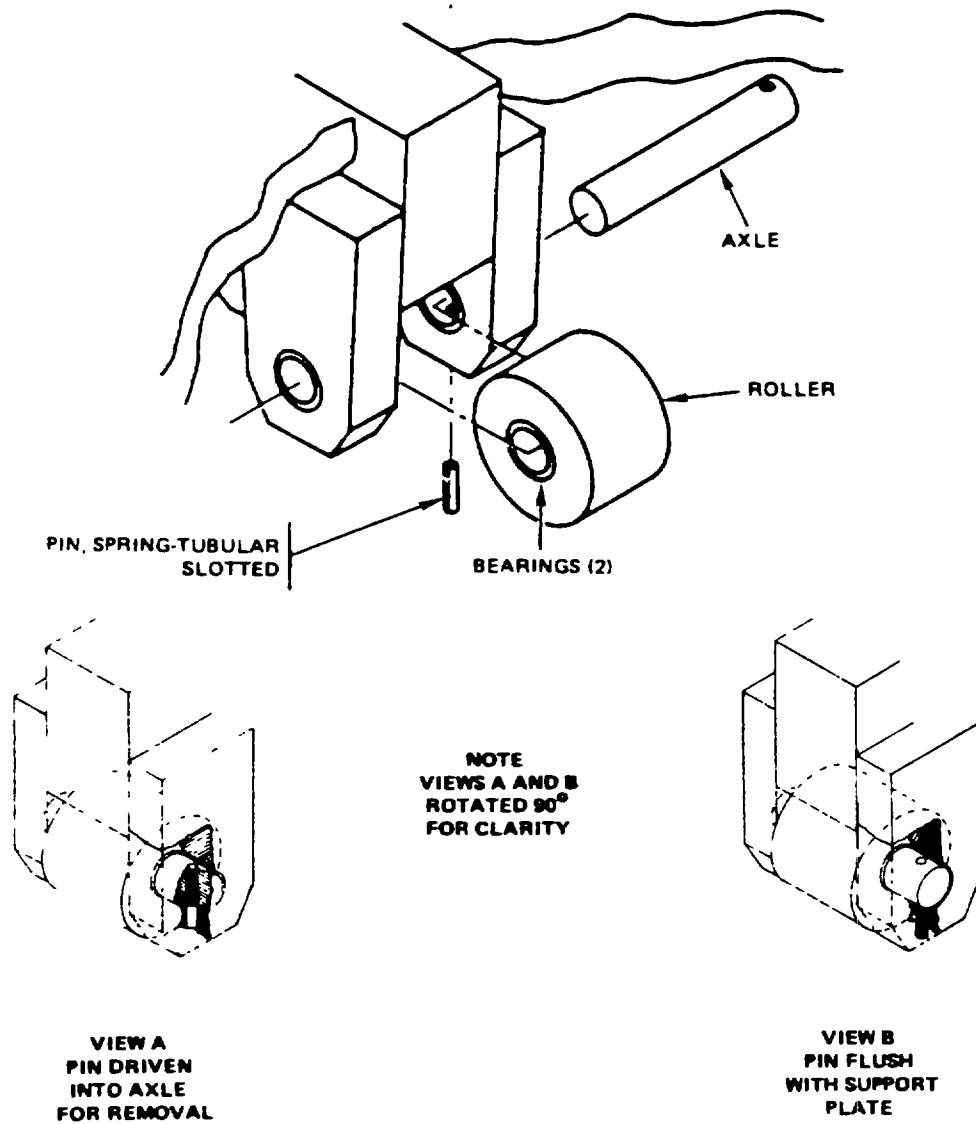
Axle and Roller. Disassembly for Lubrication.
